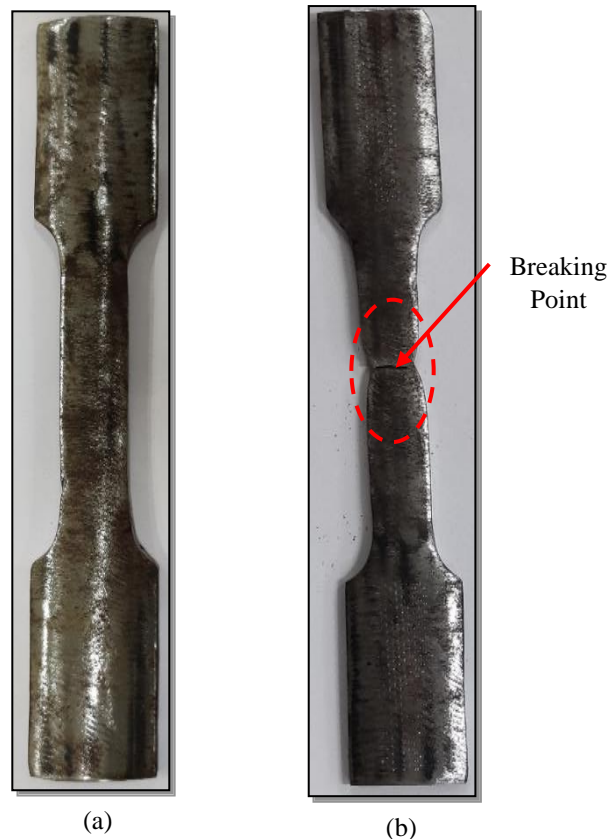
Tensile coupon test specimen (a) Coupon test specimen before failure, (b) Coupon test specimen after failure
